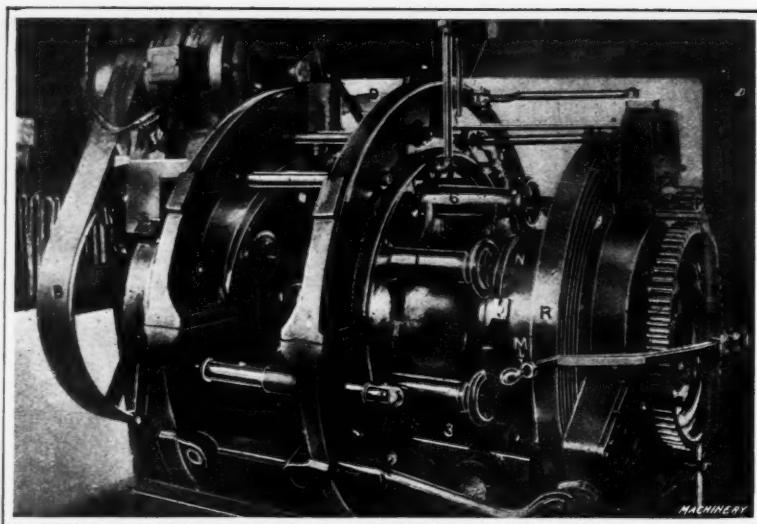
Front View of Semi-automatic Machine for machining Exterior of British 18-pounder High-explosive Shell
